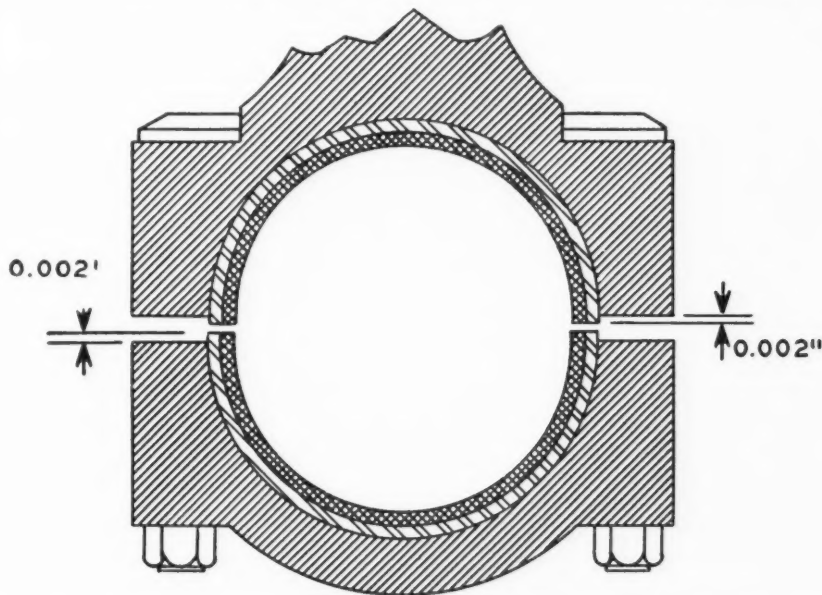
The bearing ends should project approximately 0.002 inches beyond the surfaces of the rods and caps in order to assure tight fit of the bearings.
